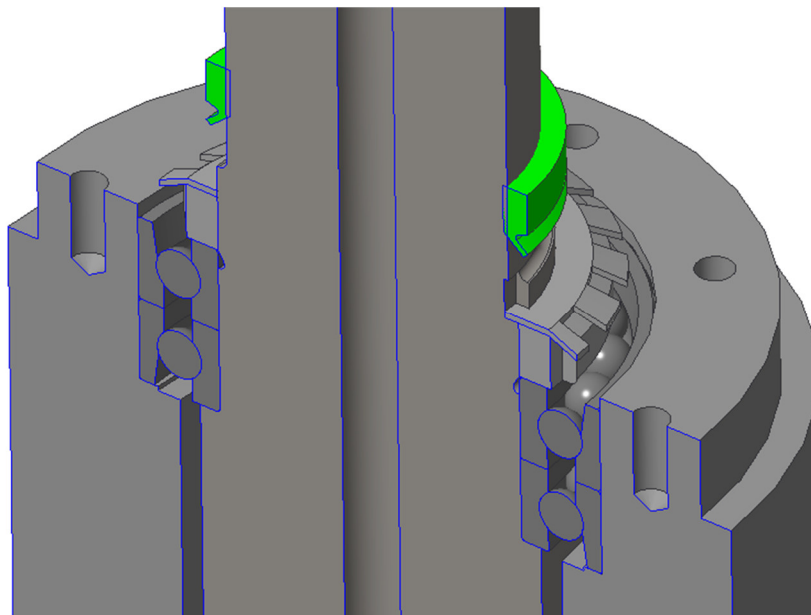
TTL Angular Contact Ball Bearings with Lock Nut and Washer
